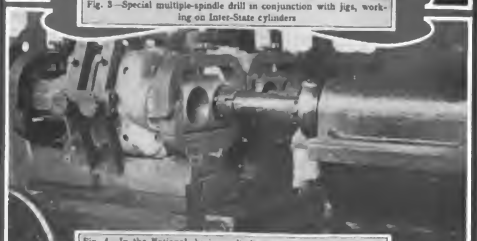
Special multiple-spindle drill in conjunction with jigs, working on Inter-State cylinders
